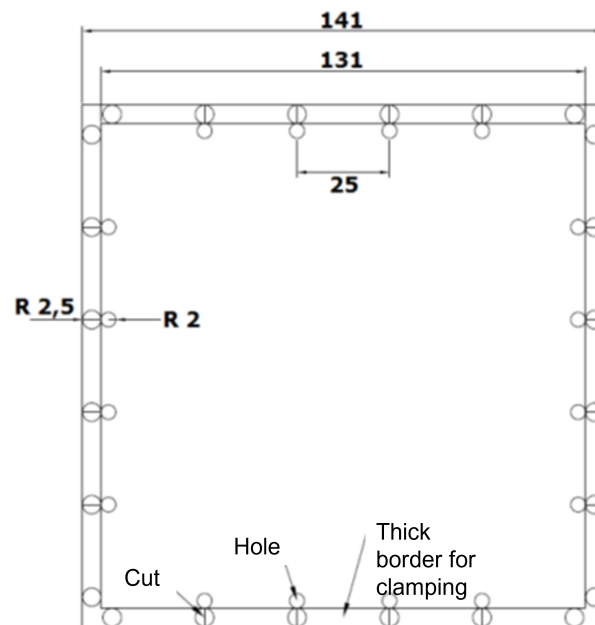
Geometry and dimensions of the square shaped specimen for biaxial testing [50]. Dimensions in millimeters.
